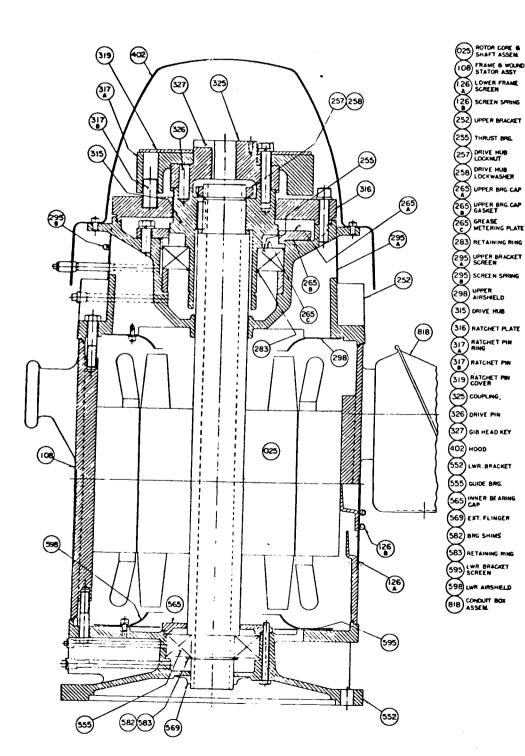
Arrangement of Parts, Vertical Hollow Shaft Dripproof Life Line Motor, Type G Frames 320TP-440TP (Solid Shaft Motors use same Construction except Top Coupling and Ratchet Pins are Omitted.)
